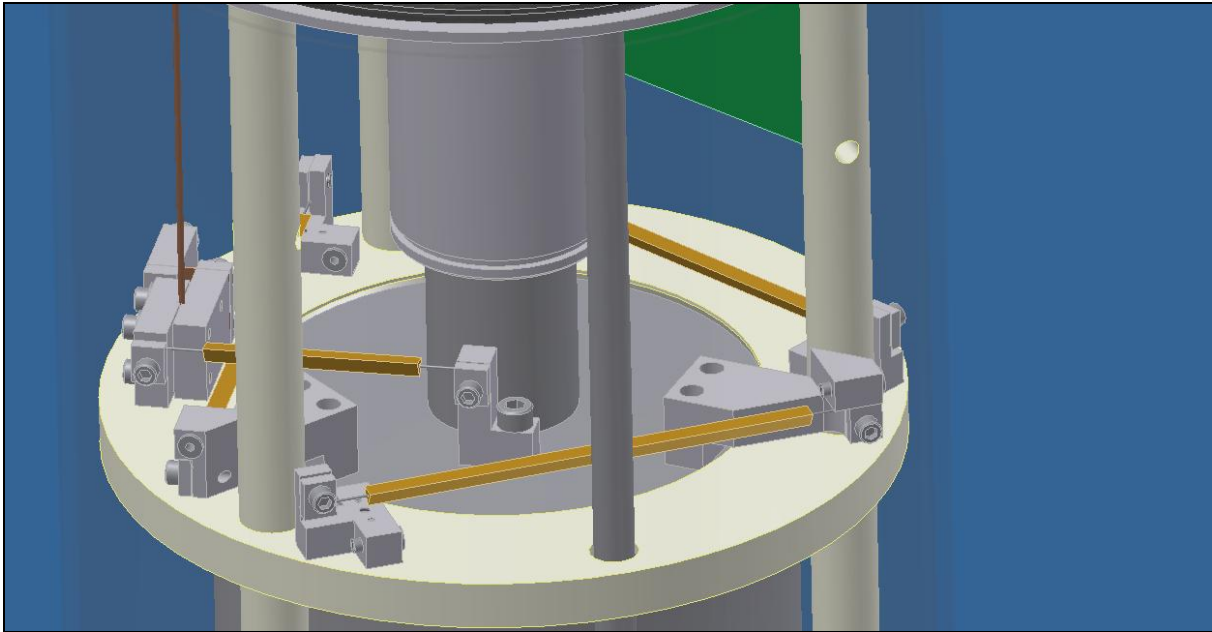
Inside View of GS-13LH Showing Bottom End of Spring Assembly (now Removed).
